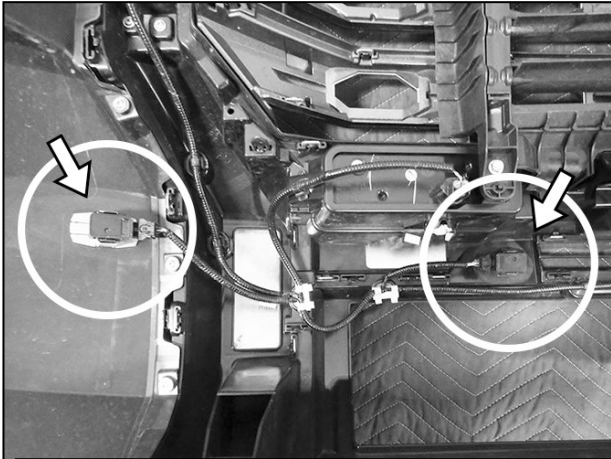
Models without front sensors, push sensor plugs into mounts
